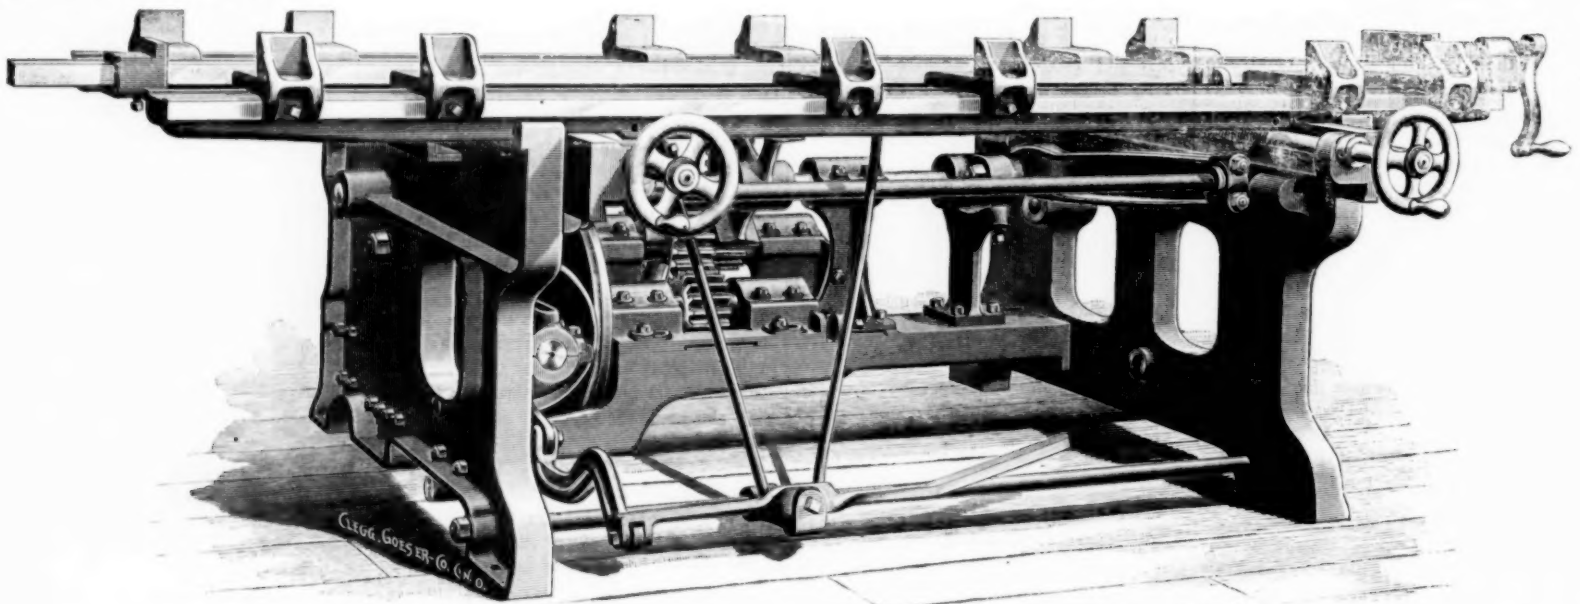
POWER DOOR AND BLIND CLAMP.
